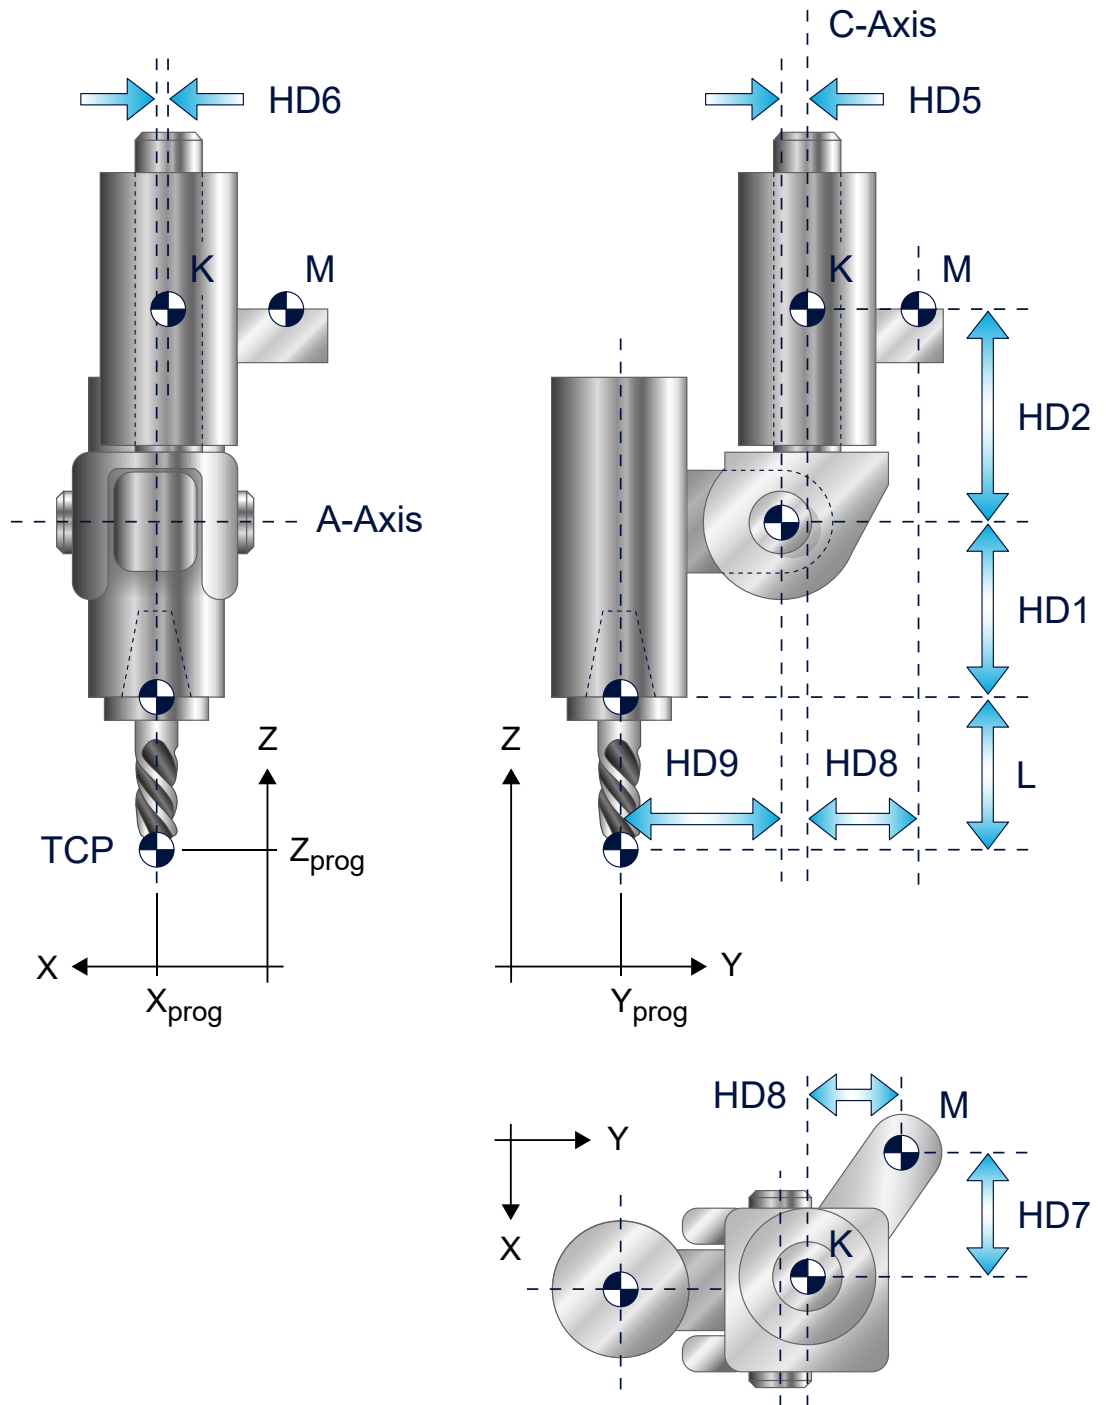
5-axis boring and milling tool (zero position where $HD3 = 0$, $AM=0$, $HD4=0$, $CM=0$)
